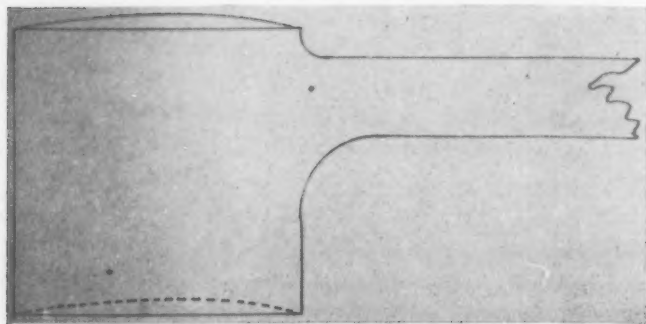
CROWNING COPE TO PREVENT DRAW-DOWN OFTEN RESULTS IN THE DRAG SURFACE DRAWING IN.
